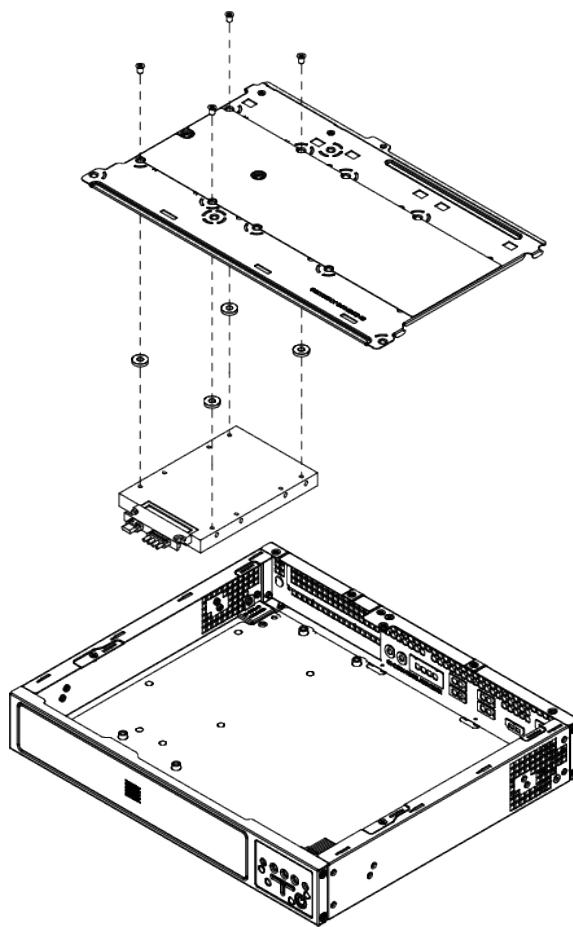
Attaching the Storage Drive to the Support Bracket
